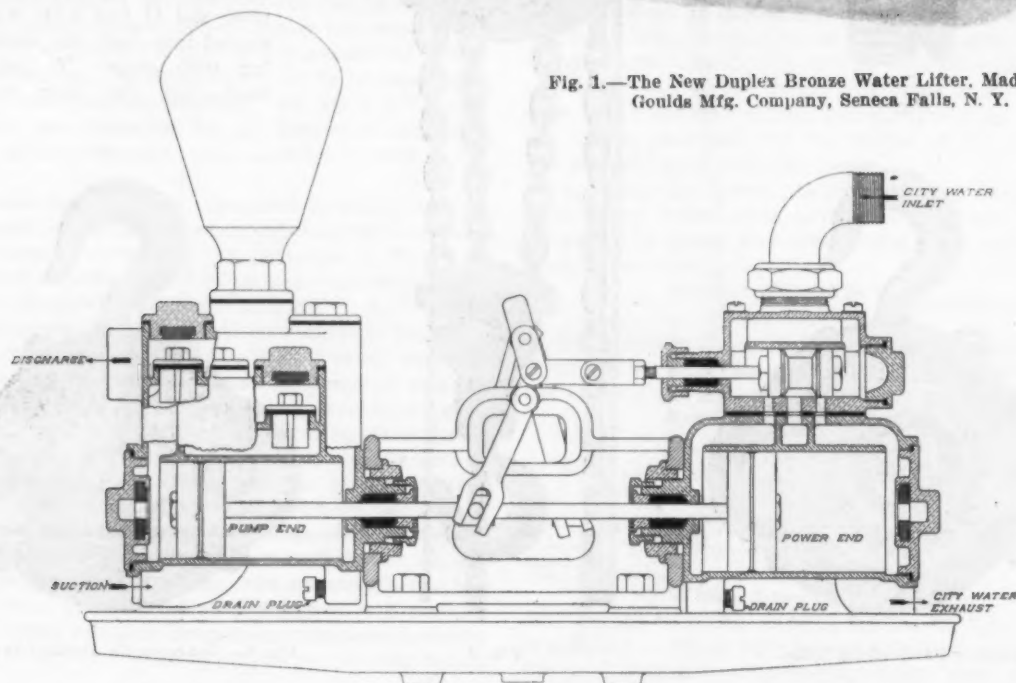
Sectional Elevation through One-Half of the Goulds New Duplex Water Lifter.
